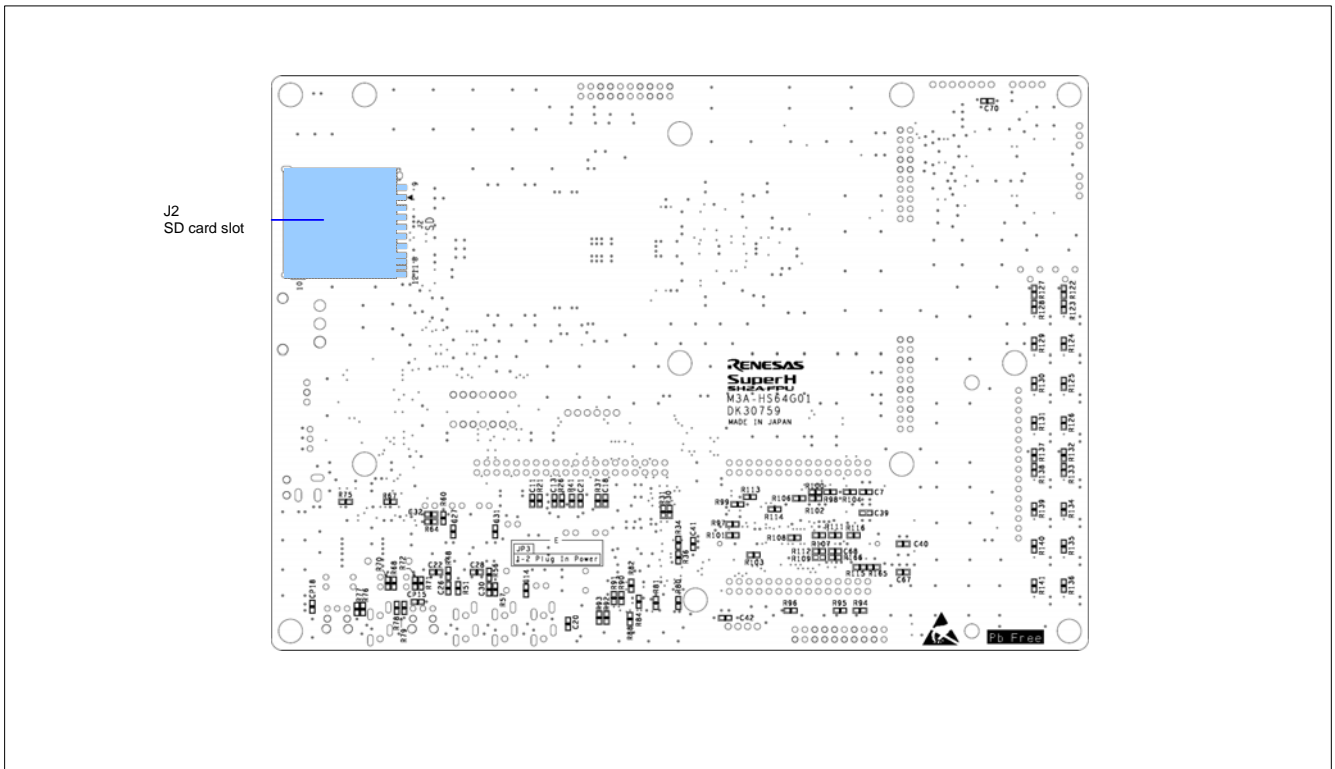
M3A-HS64G01 Layout and Component Placement (Top View of the Solder Side)
